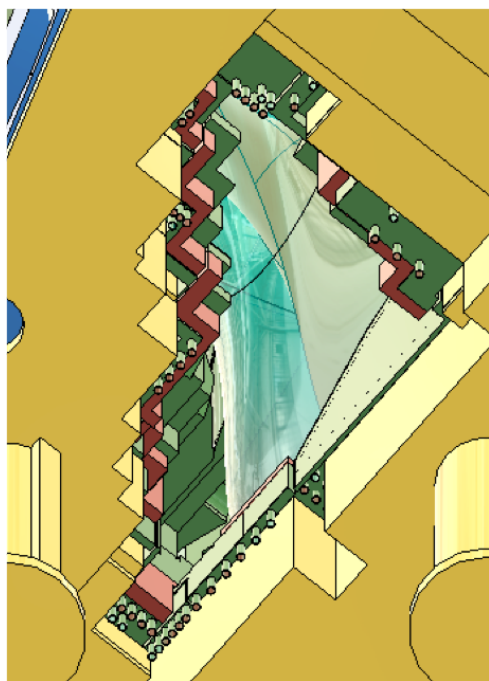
Bottom view of the exhaust pipes equipped on the BB blankets.
